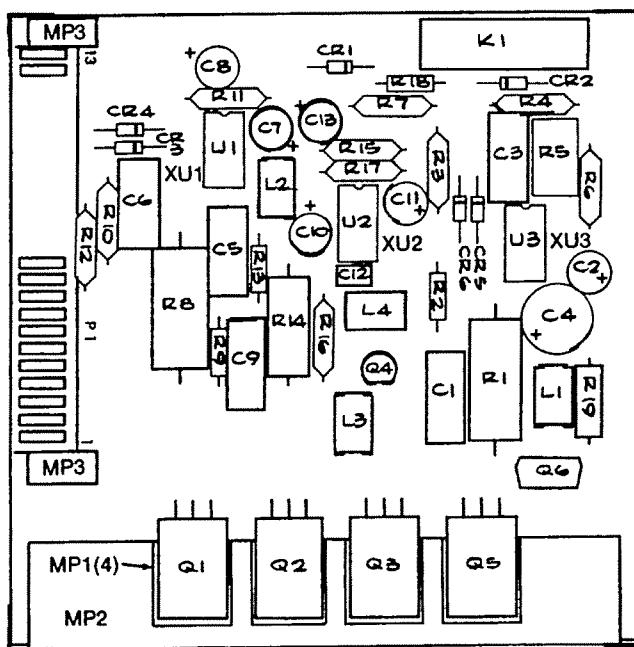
A6A3 +5V Series Pass PCB Assembly
